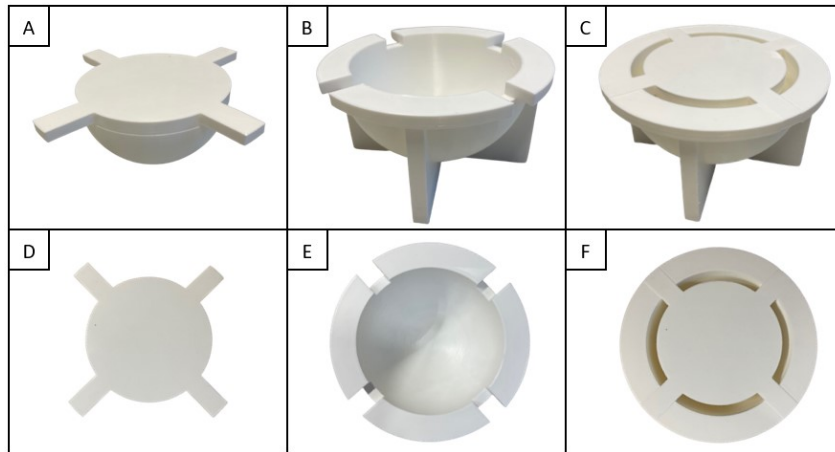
Pictures of the 3D printed mould used for the fabrication of the bladder phantom. A) Inner part of the mould. B) Outer part of the mould. C) Inner part inside the outer part of the mould. D) Top view of the inner part of the mould. E) Top view of the outer part of the mould. F) Top view of the inner part inside the outer part of the mould.
